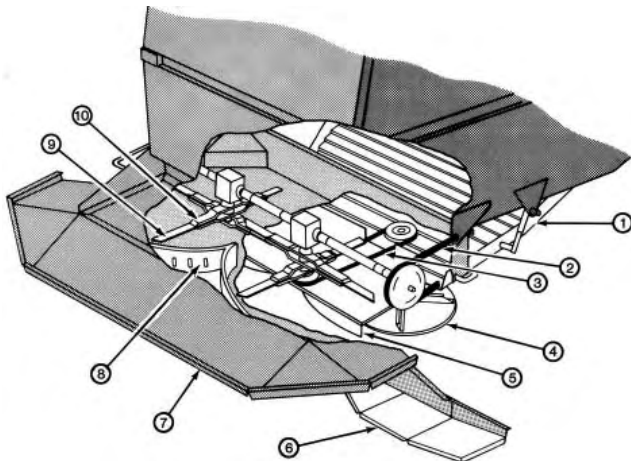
Straw Storm Straw and Chaff Spreading Attachment: (1) Chaff Pan, (2) Main Drive Belt, (3) Chaff Spreader Drive Belts, (4) Chaff Spreading Discs, (5) Chaff Deflector Shield, (6) Side Deflectors, (7) Rear Shield, (8) Shroud, (9) Flails, (10) Rotors.
